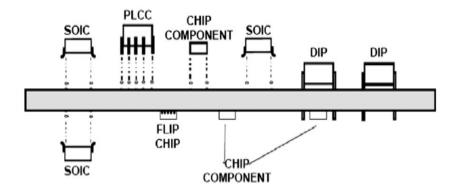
Component mounted on both sides of the board (ANSI,1998) [39].
